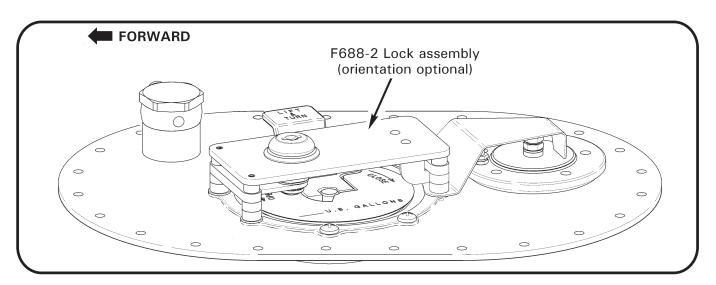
F688-2 Lock assembly installed (F250-1 cover shown; F250-10 similar)
